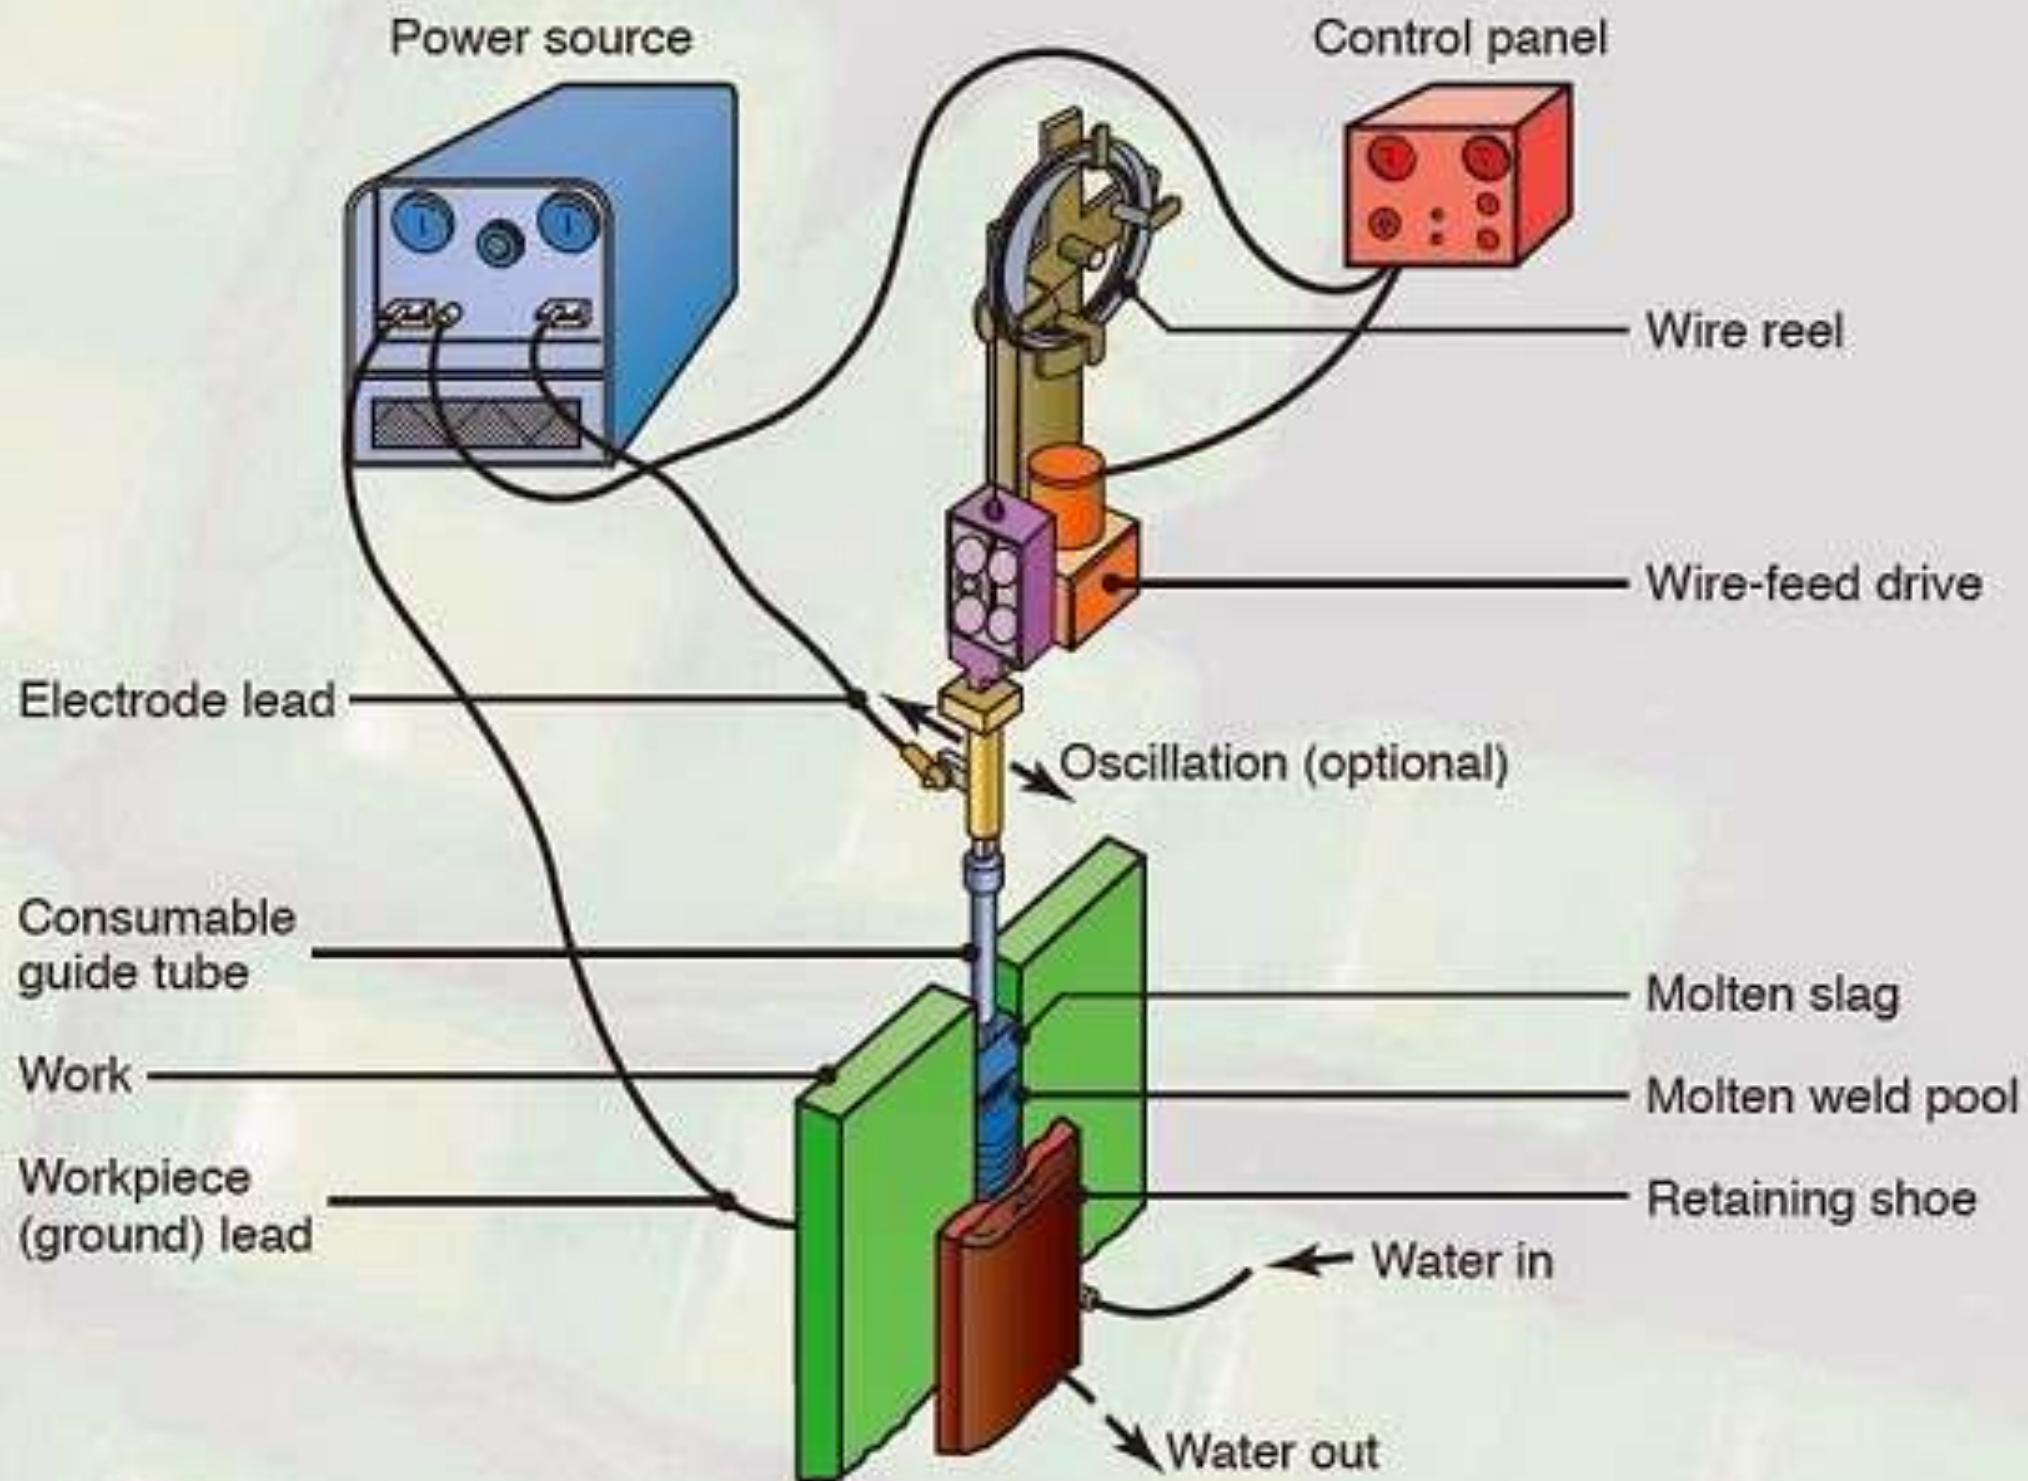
Electroslag Welding Process Nomenclature
